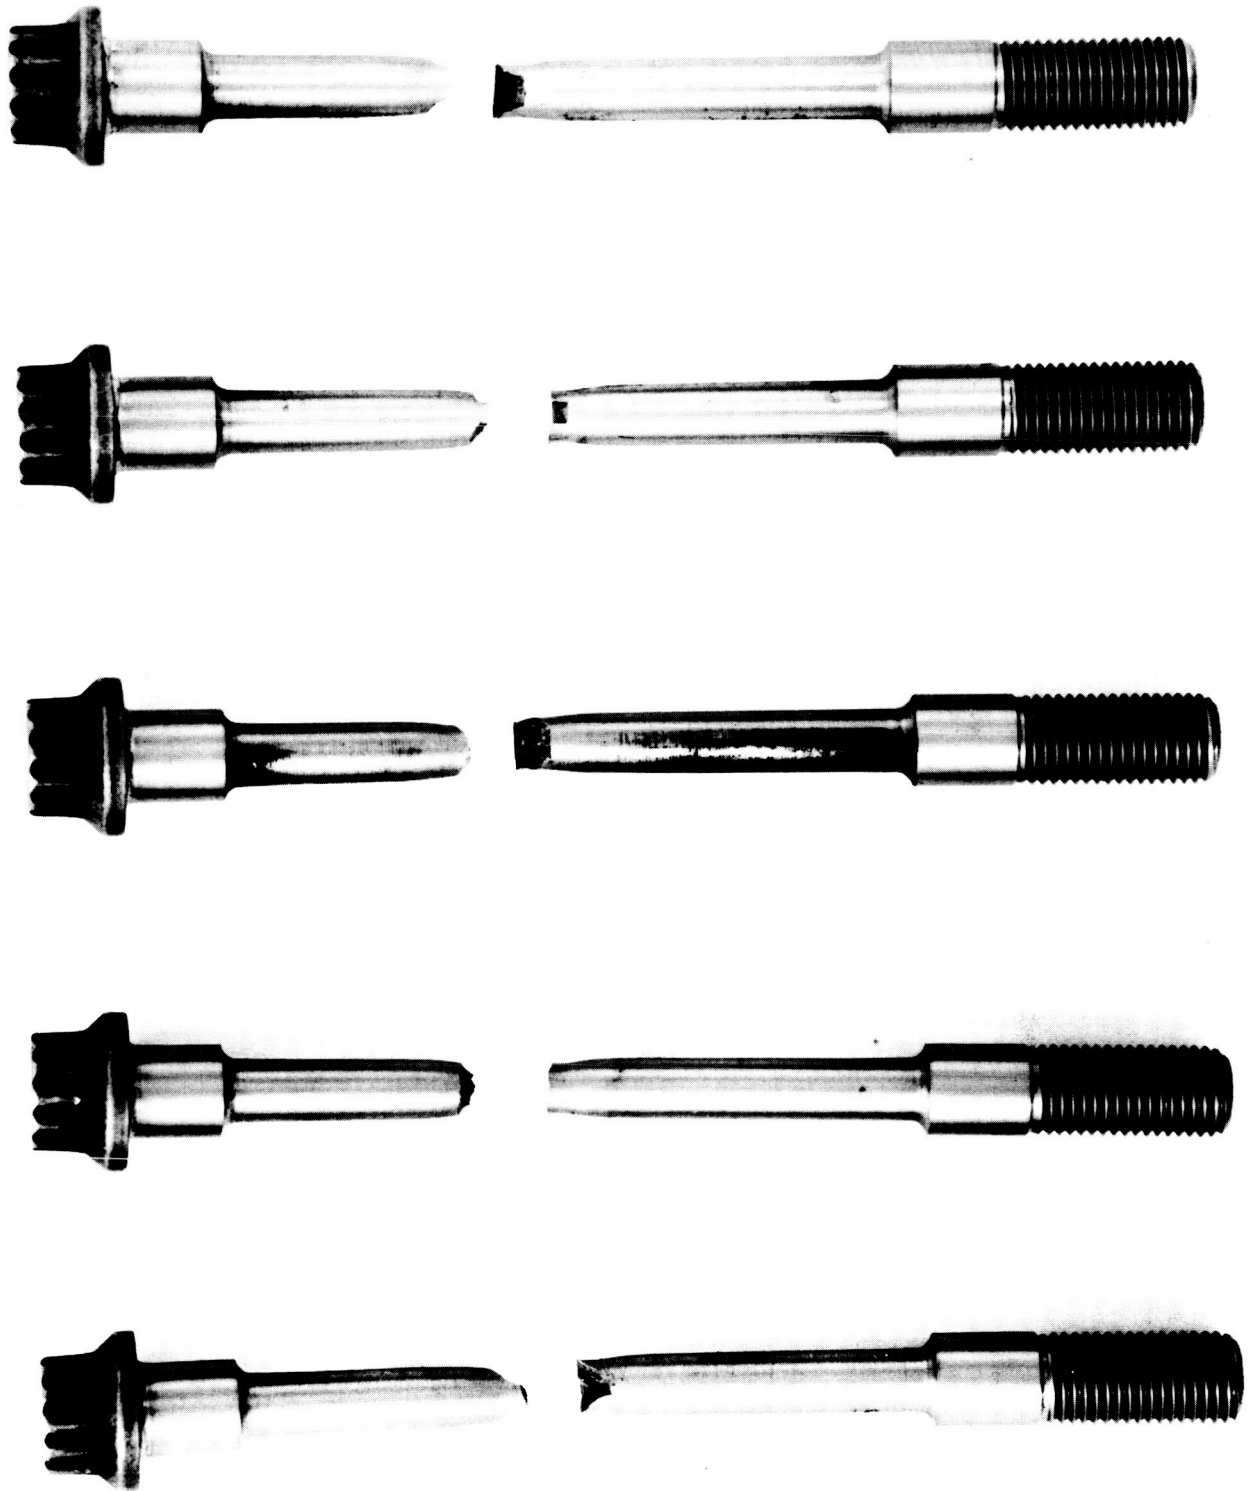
BOLT TEST SPECIMEN CONFIGURATIONS (A) REDUCED SHANK (B) V-NOTCH
